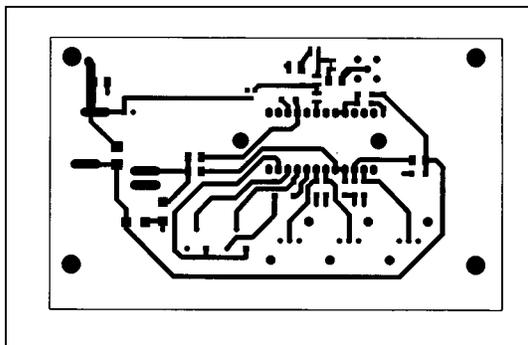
MAX445 EV Kit PC Board Layout—Component Side
